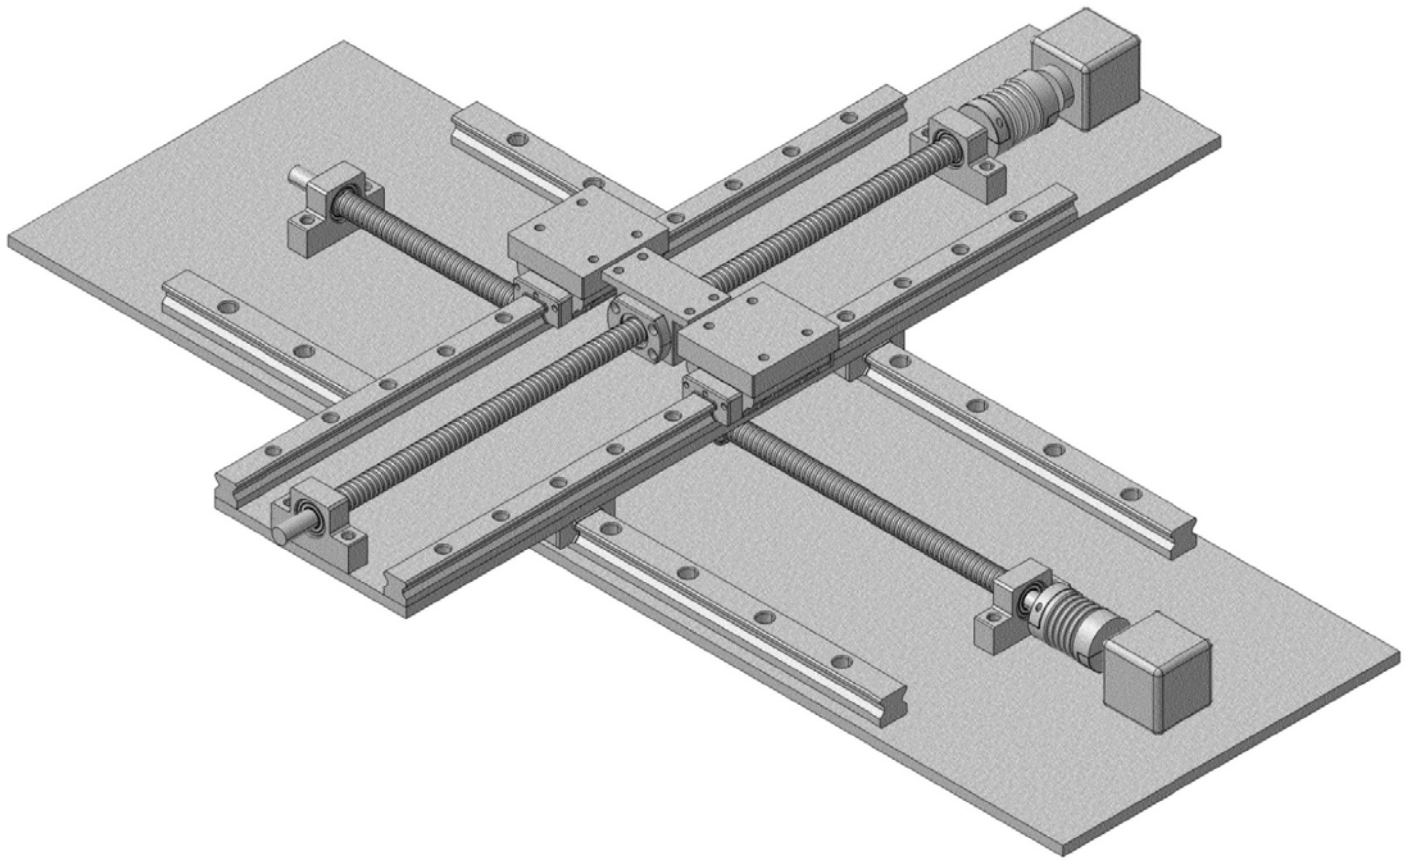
X-Y TABLE ASSEMBLY (ISOMETRIC VIEW)
